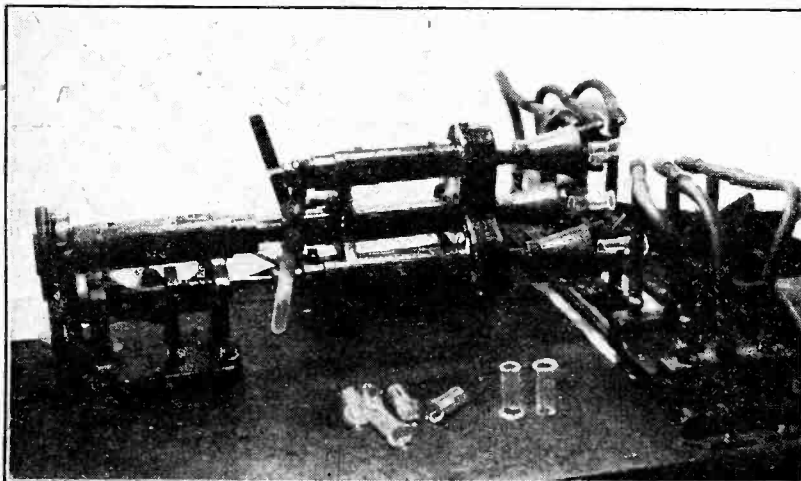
New machinery is constantly being designed for use in valve manufacture. This machine automatically cuts the foot tube to size and bells out the ends.
